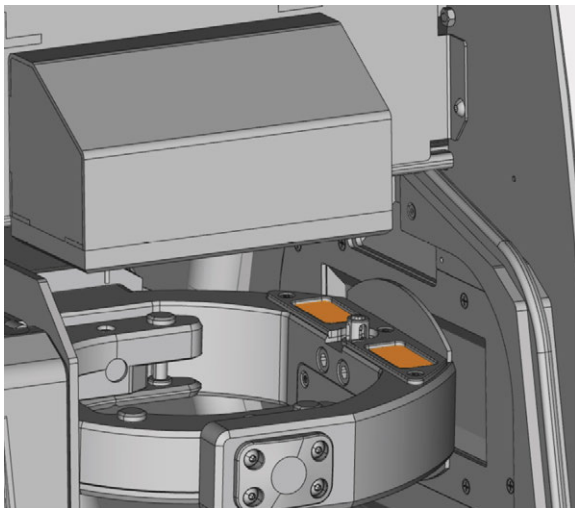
TOOL MAGAZINE IN THE WORKING CHAMBER (MARKED ORANGE)
